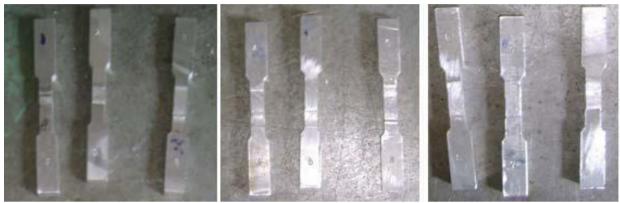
Friction stir welded pieces for all 9 experiments
